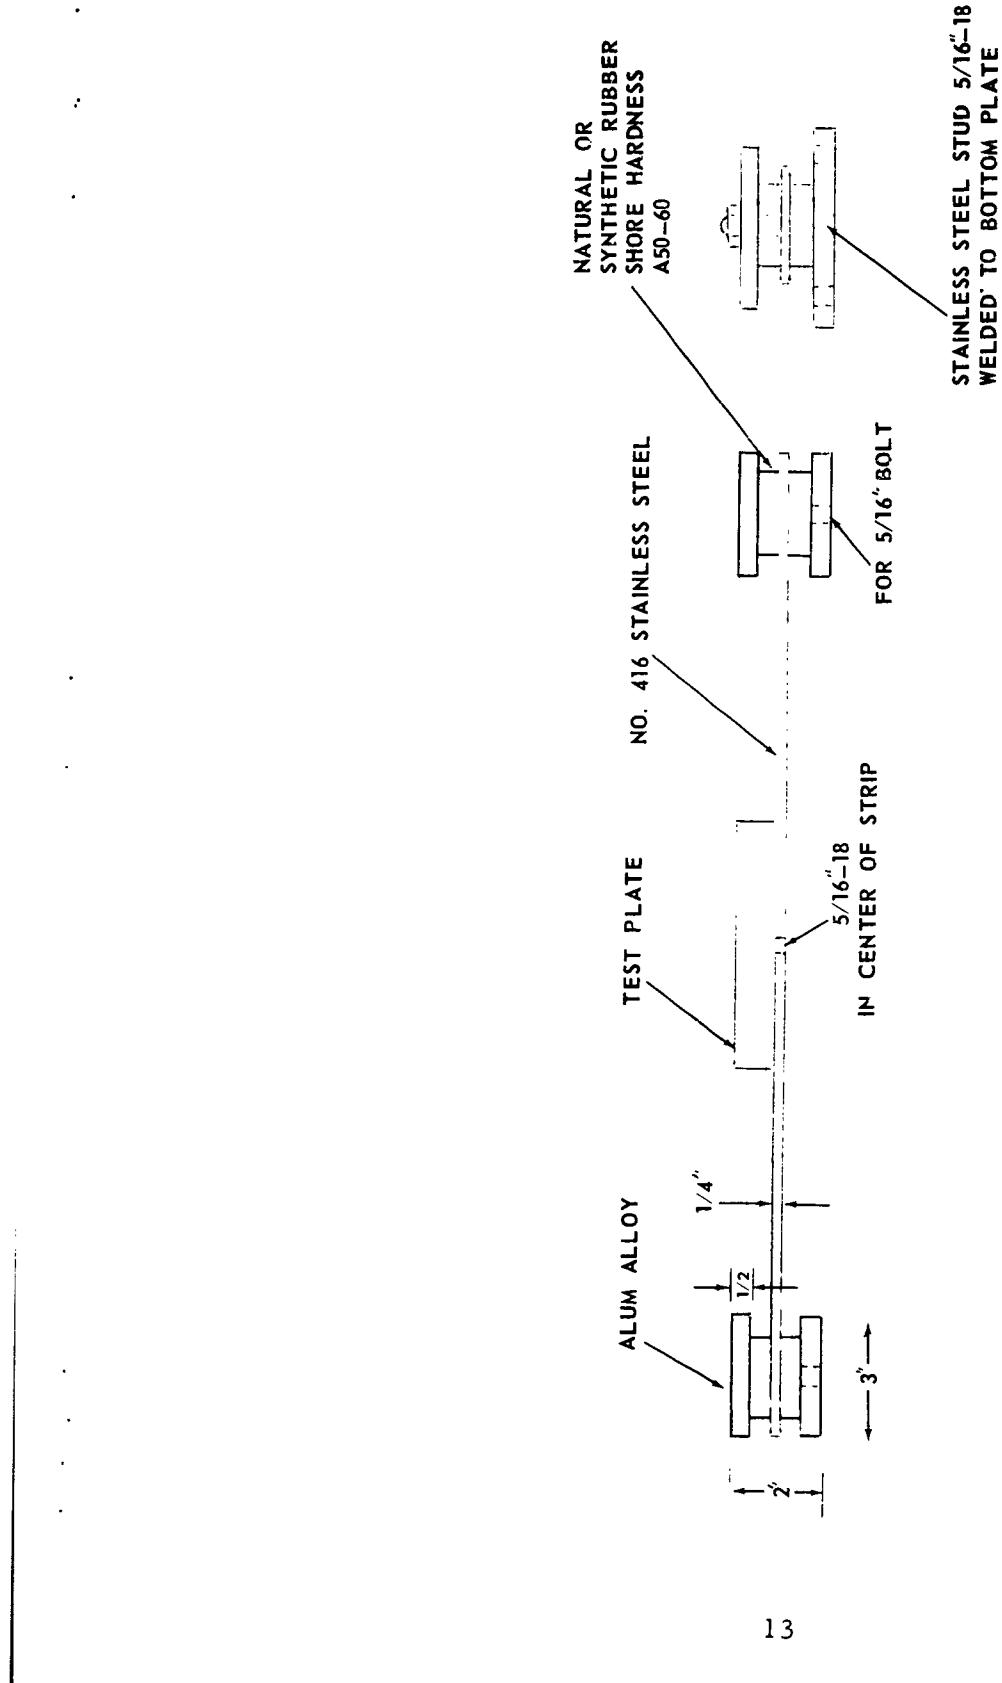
Threaded Fastener Locking Devices - Simultaneous Shock & Vibration Test Fixture
